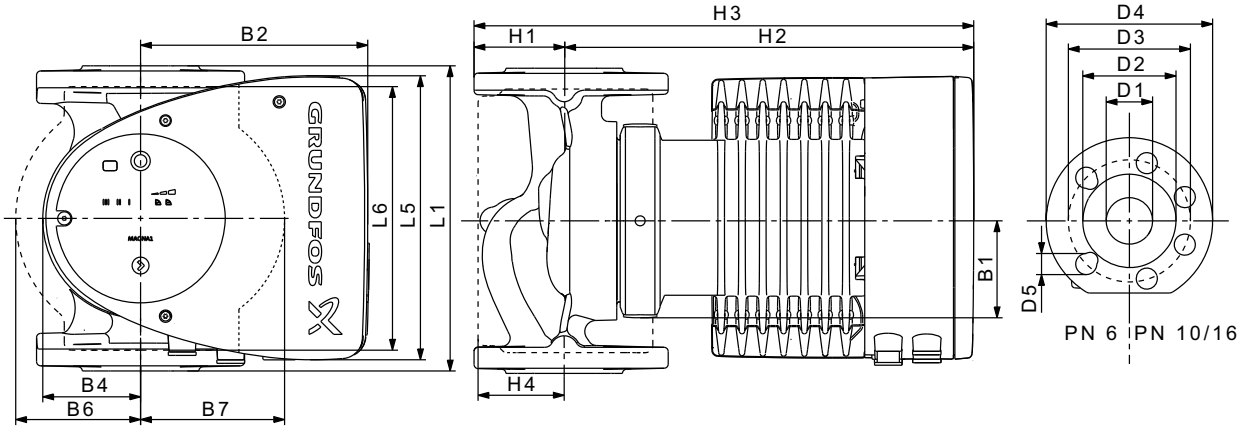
Single-head pump dimensions, terminal-connected versions, flanged version
